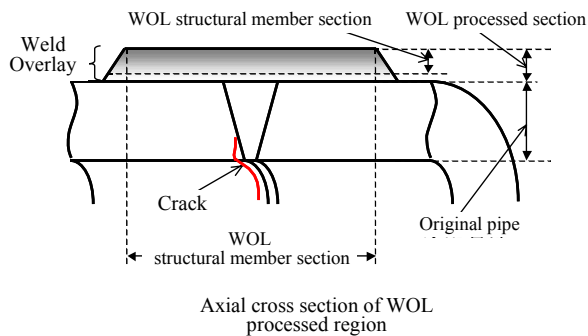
Outline of Piping Cross-Section for the Weld Overlay Method
